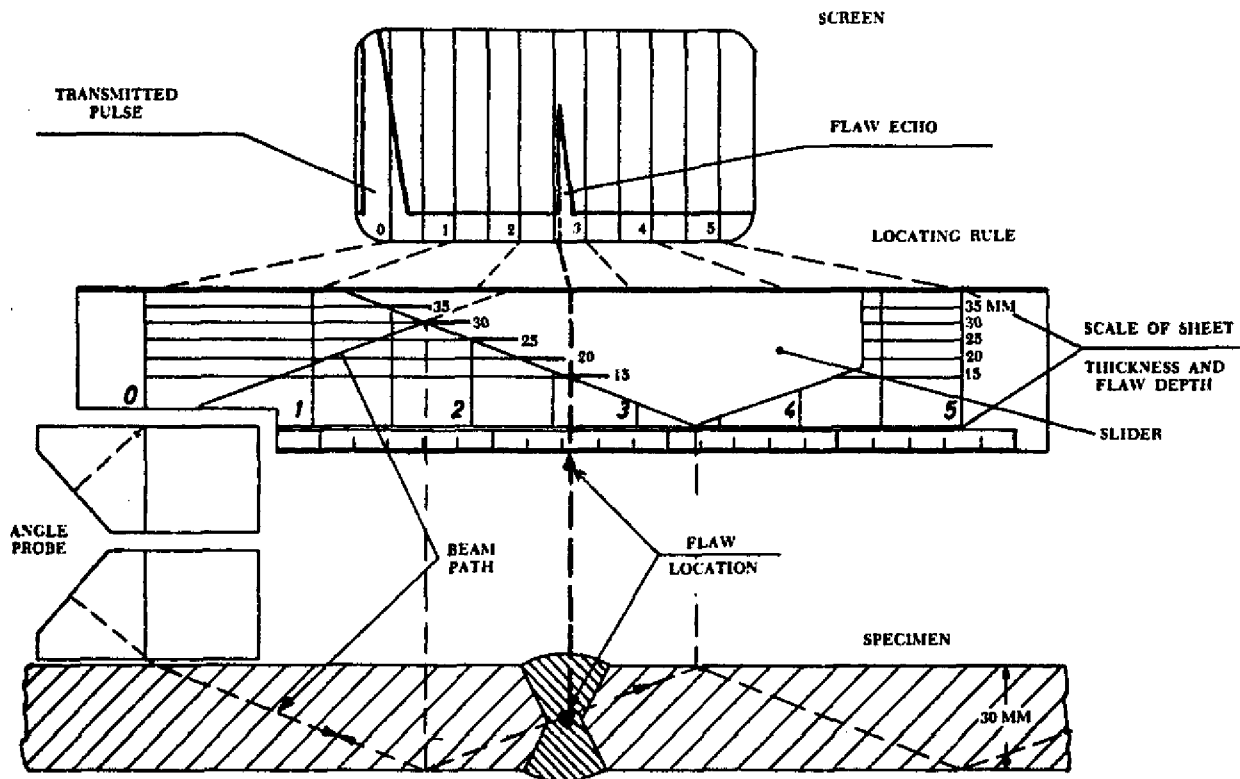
Diagram to show the method of using a flaw-locating rule.
